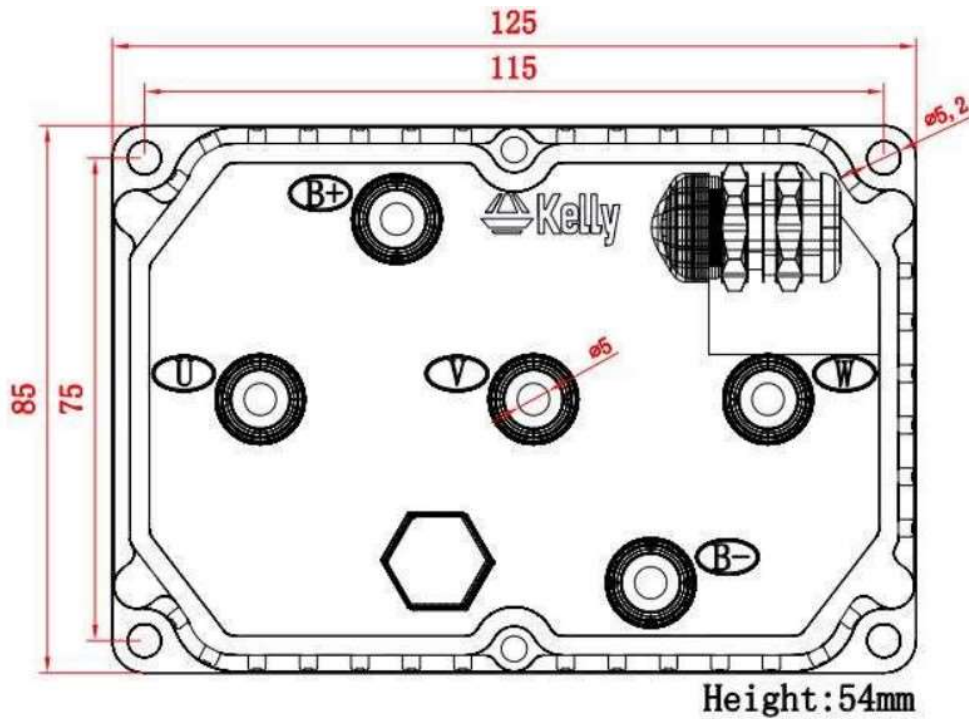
KLS2412N/NX, KLS7212N/NX mounting holes' dimensions
